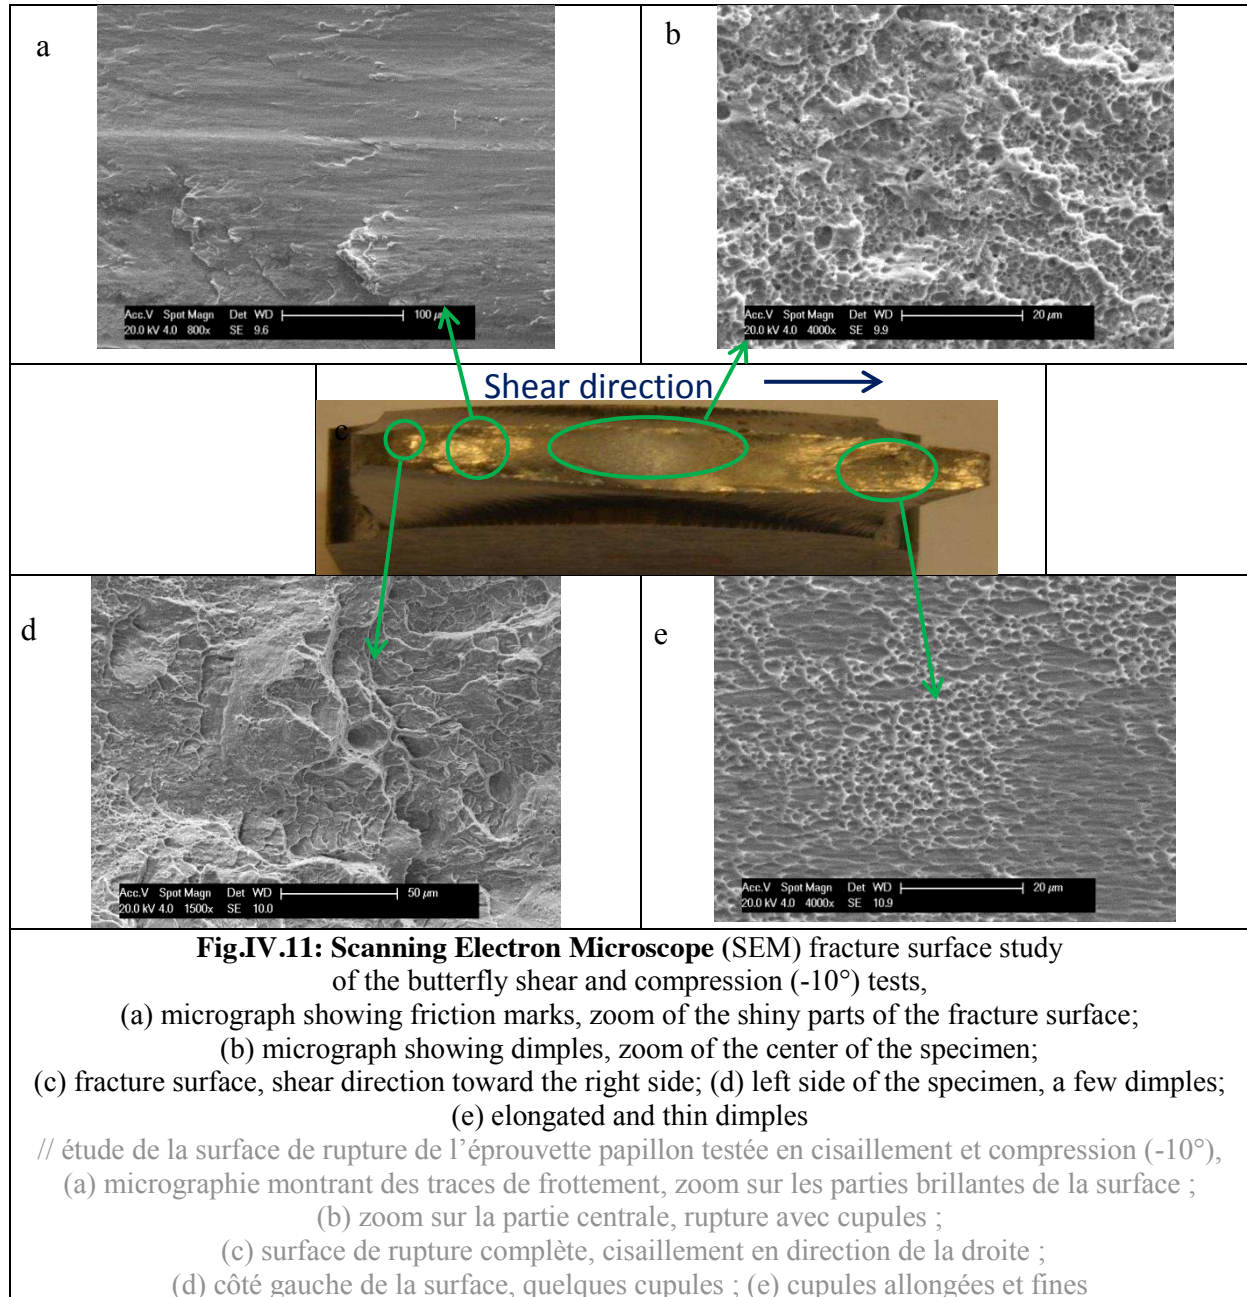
, Fig.IV.12 and Fig.IV.13 illustrate the fracture surface of the butterfly specimen respectively in shear with compression (-10°), pure shear and shear with tension ($+5^\circ$). As expected, there are dimples on the three fracture surfaces, meaning ductile fracture. They can be thin and
